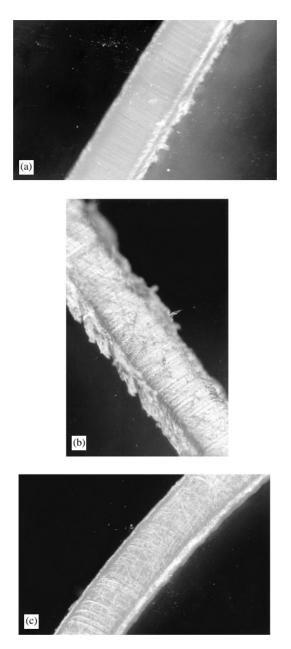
Build-up edges and shear deformation in chips: (a) LDPE at 1 mm/min; (b) LDPE at 20,000 mm/min; and (c) HDPE at 20,000 mm/min. The surface on the right-hand side is the chip-tool interface. The cutting tool moved from the right to the left.
